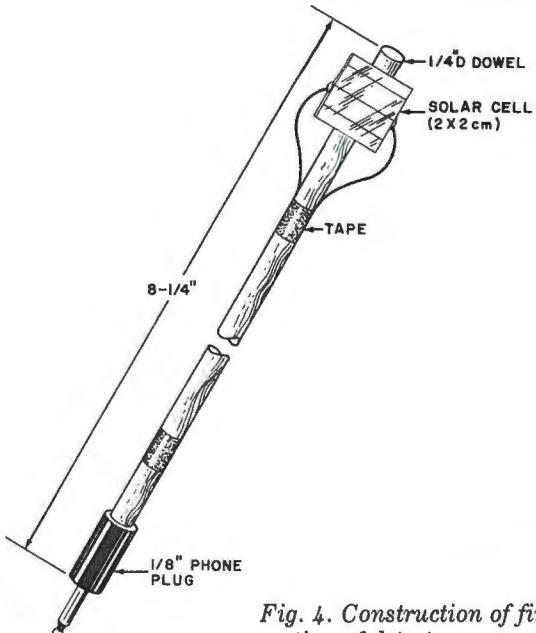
Construction of final section of detector arm, which is folded to permit door closing.
